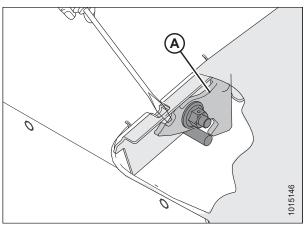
Cutterbar Door Latch (Cut Away View)
